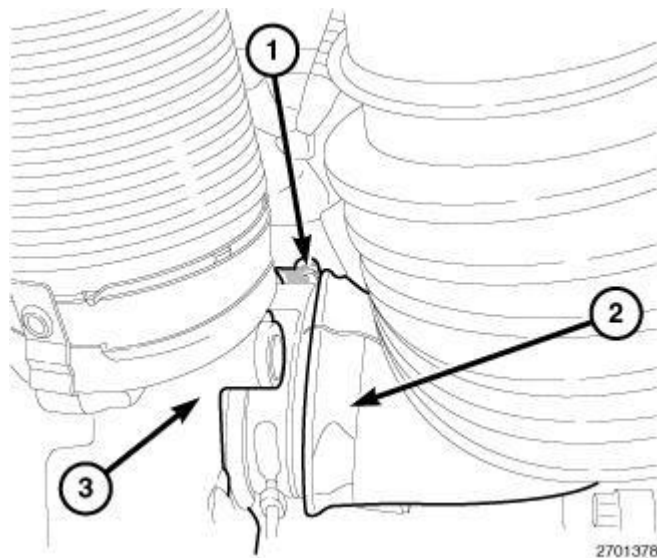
Identifying Worm Clamp, Turbocharger Air Inlet Tube & Turbocharger
